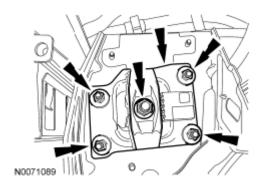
Locating Transaxle Mount Plate And Transaxle Mount Nuts Courtesy of FORD MOTOR CO.
